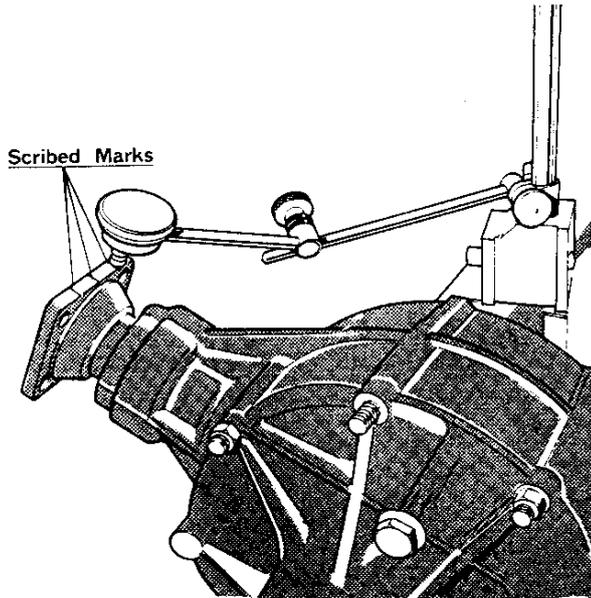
Determining pinion to crown wheel backlash using a dial gauge
